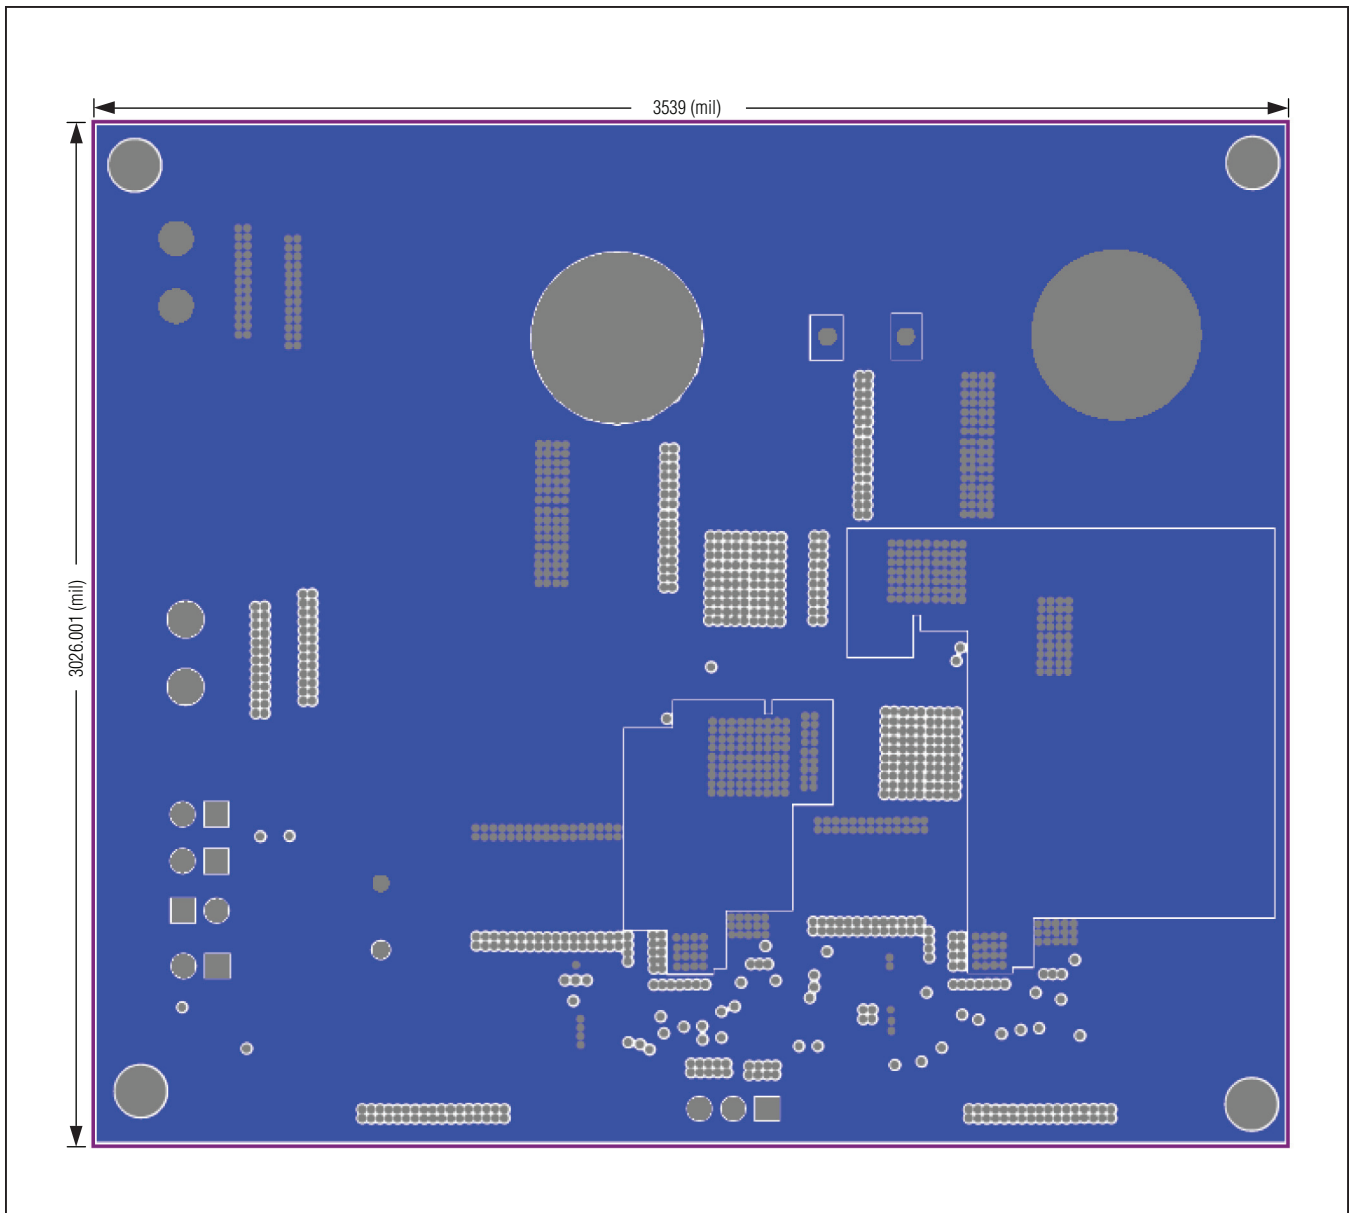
MAX8686 EV Kit PCB Layout—Bottom Layer (PGND and LX)
